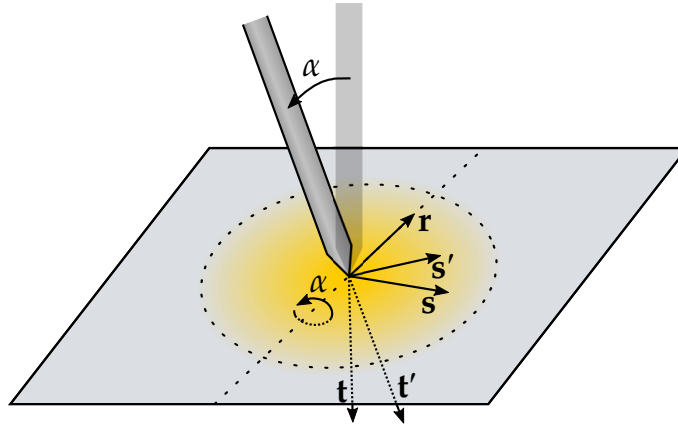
Local coordinates of the welding torch. These coordinates can be rotated about the r -axis to tilt the welding torch, forming a new set of local coordinates.
